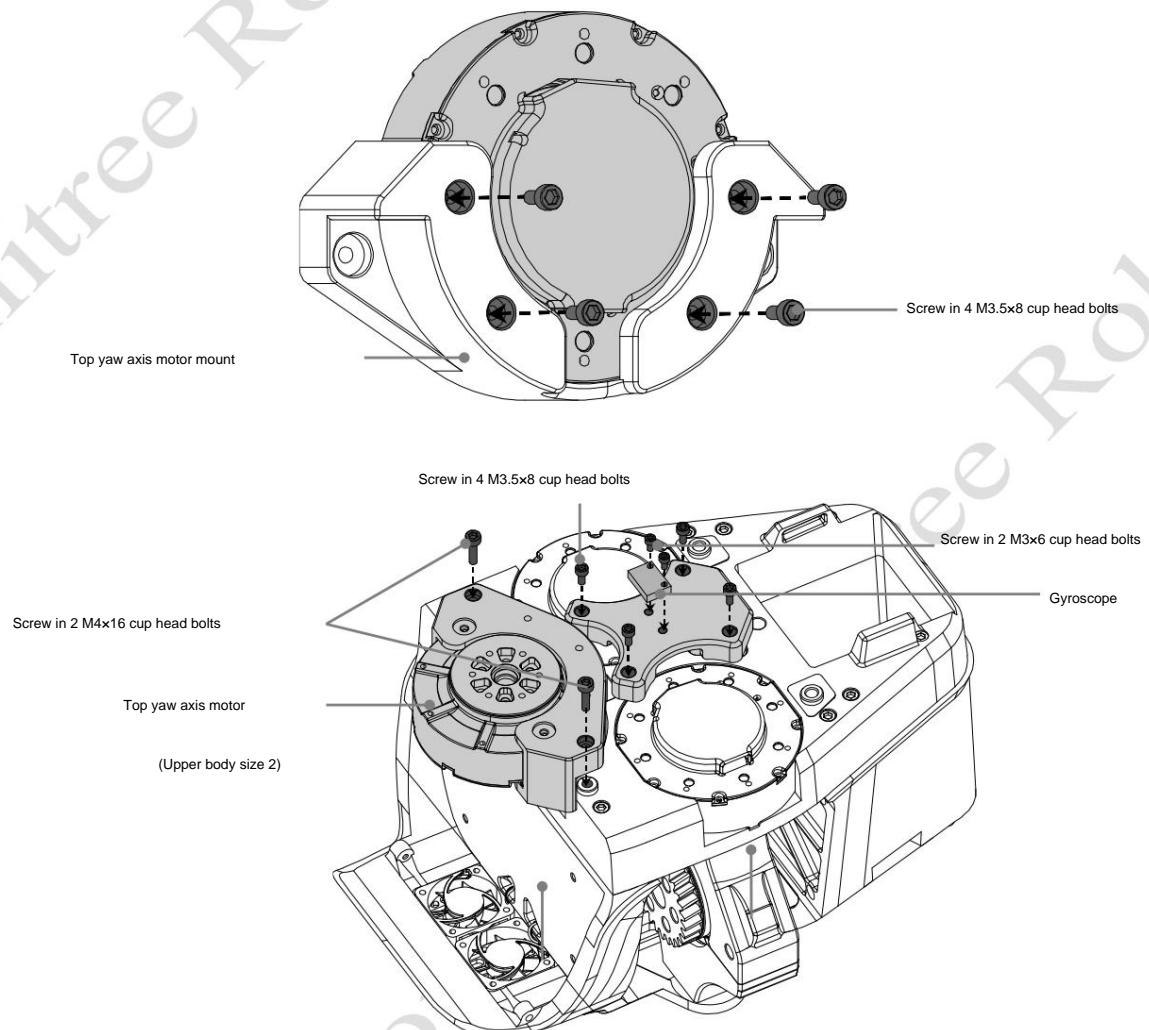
Top yaw axis motor and top gyroscope installation diagram
